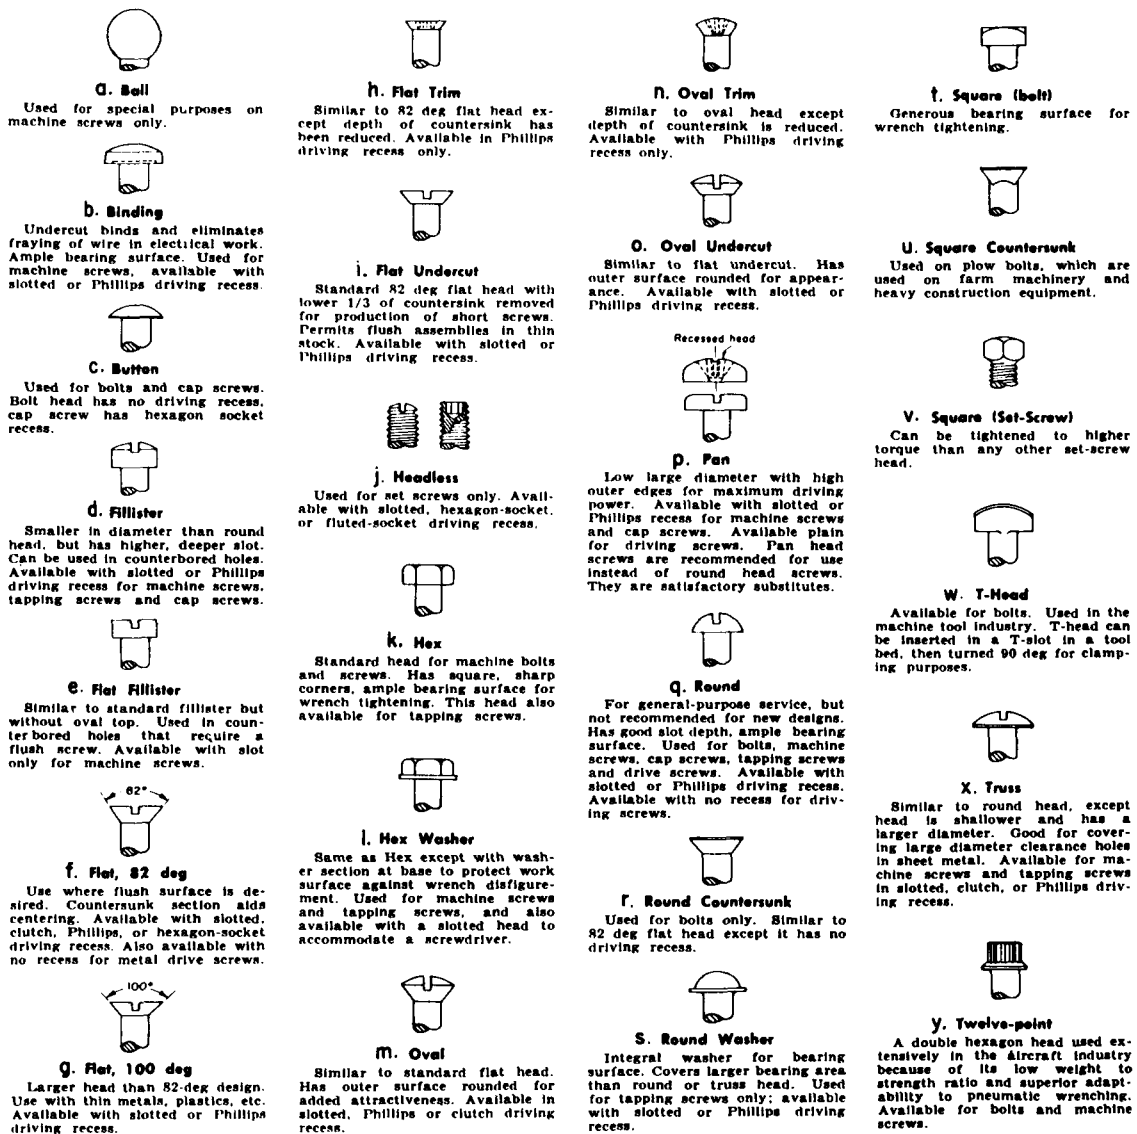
THREADED-FASTENER HEAD STYLES (REF. 1)
